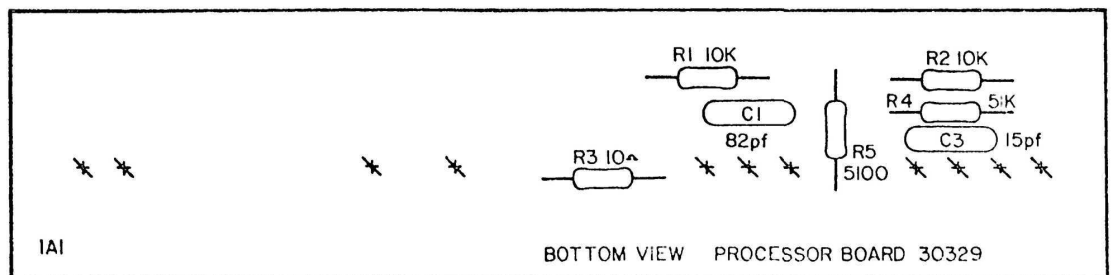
PROCESSOR BOARD COMPONENT LOCATIONS
